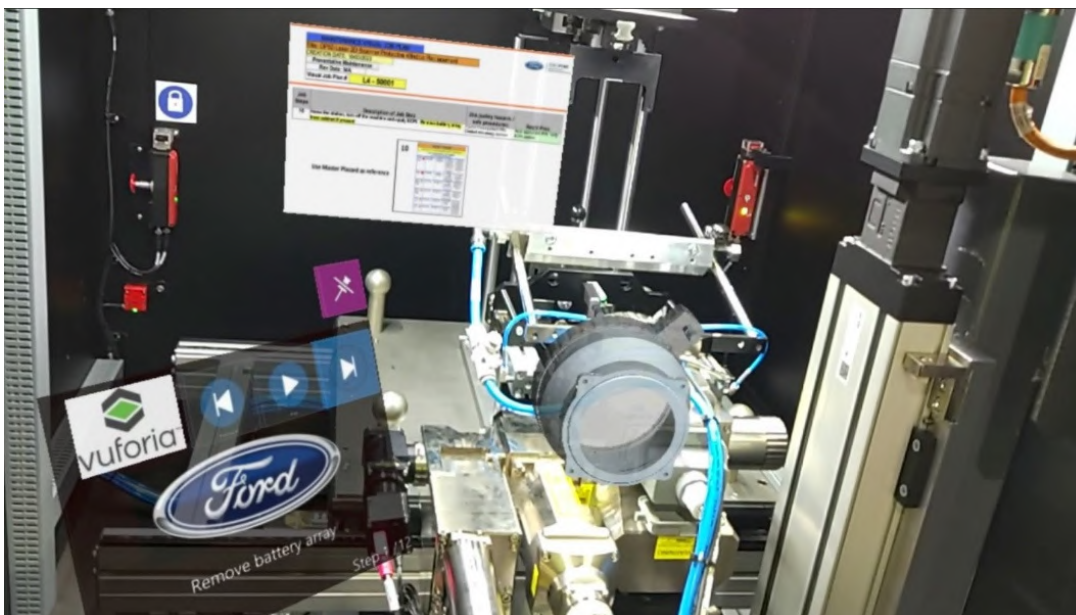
Battery Tab Welding Machine – OP50 Laser welder – with AR view 2
